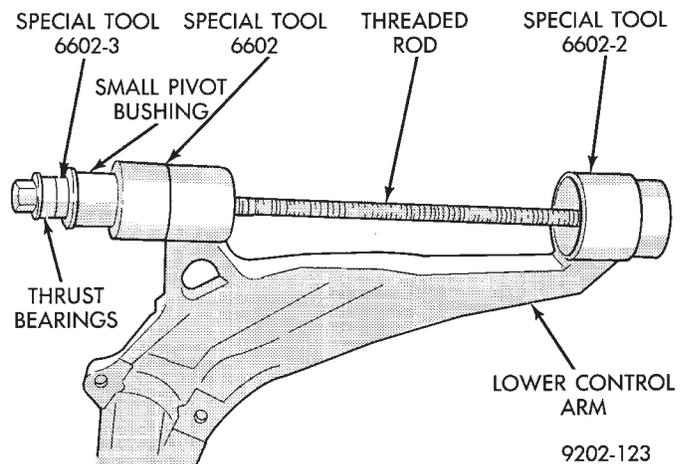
Bushing And Tool Position For Installation In Control Arm
